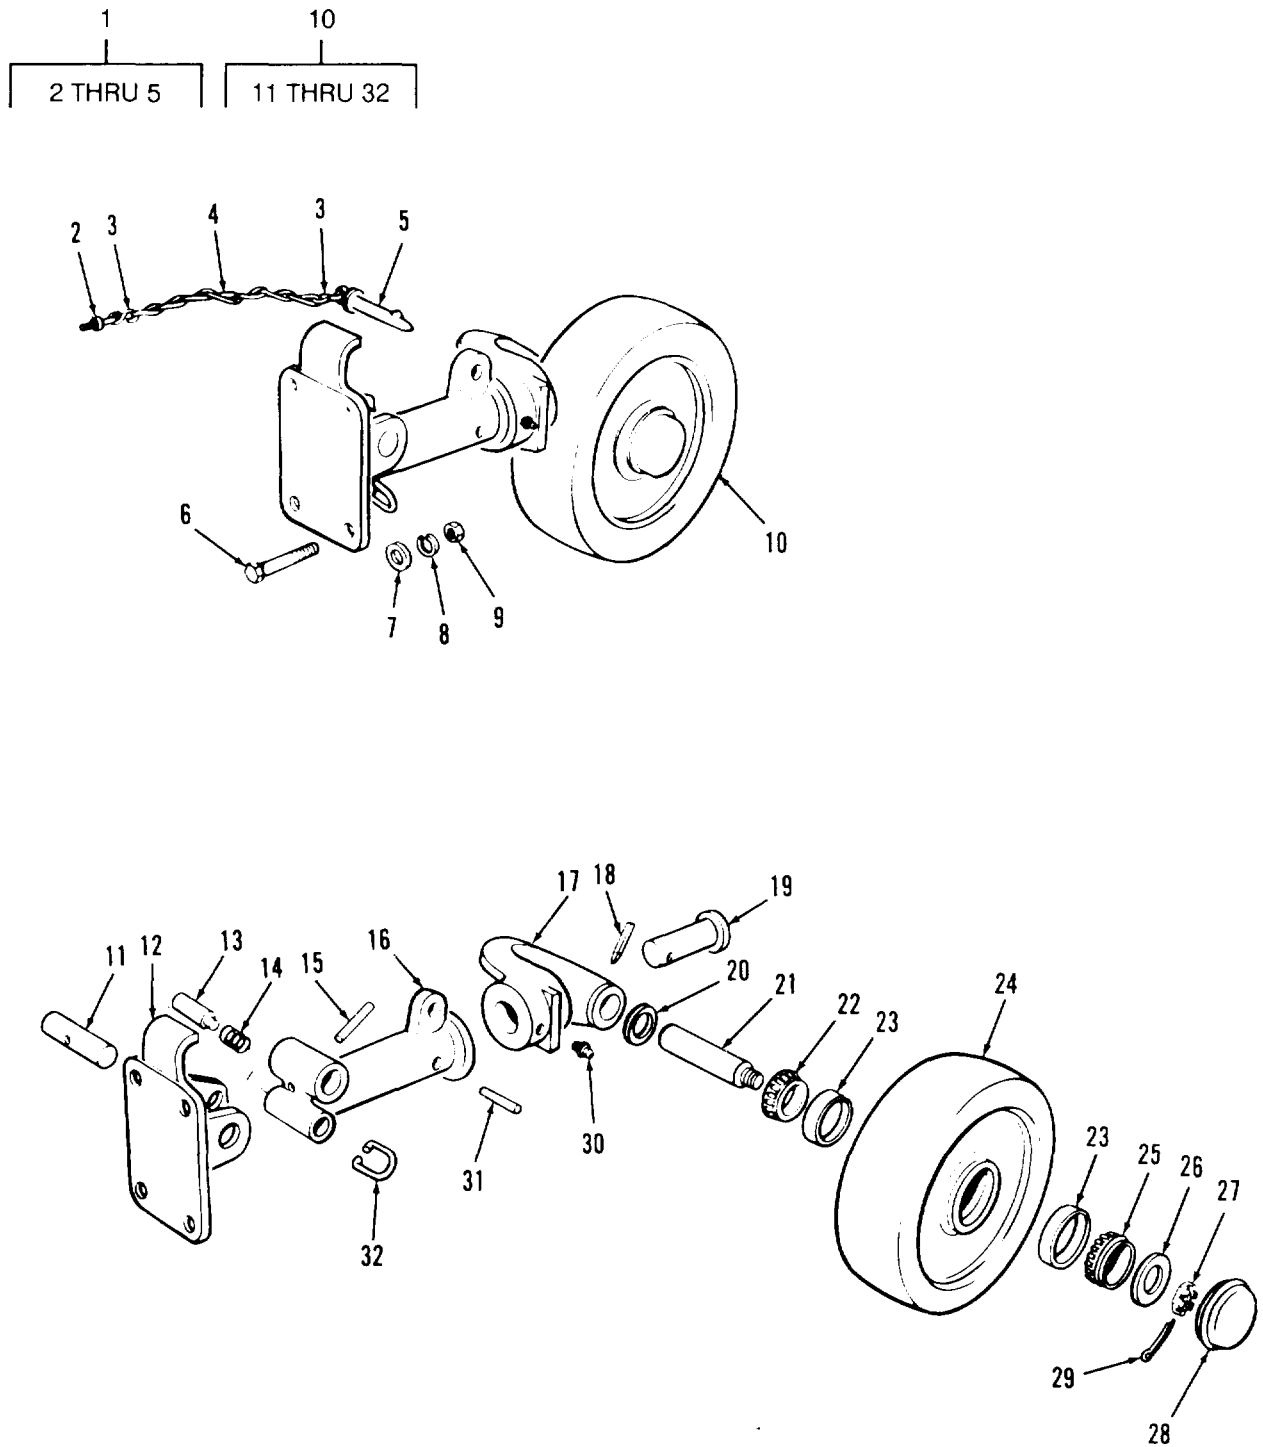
RETRACTABLE SUPPORT ASSEMBLY (M514).
